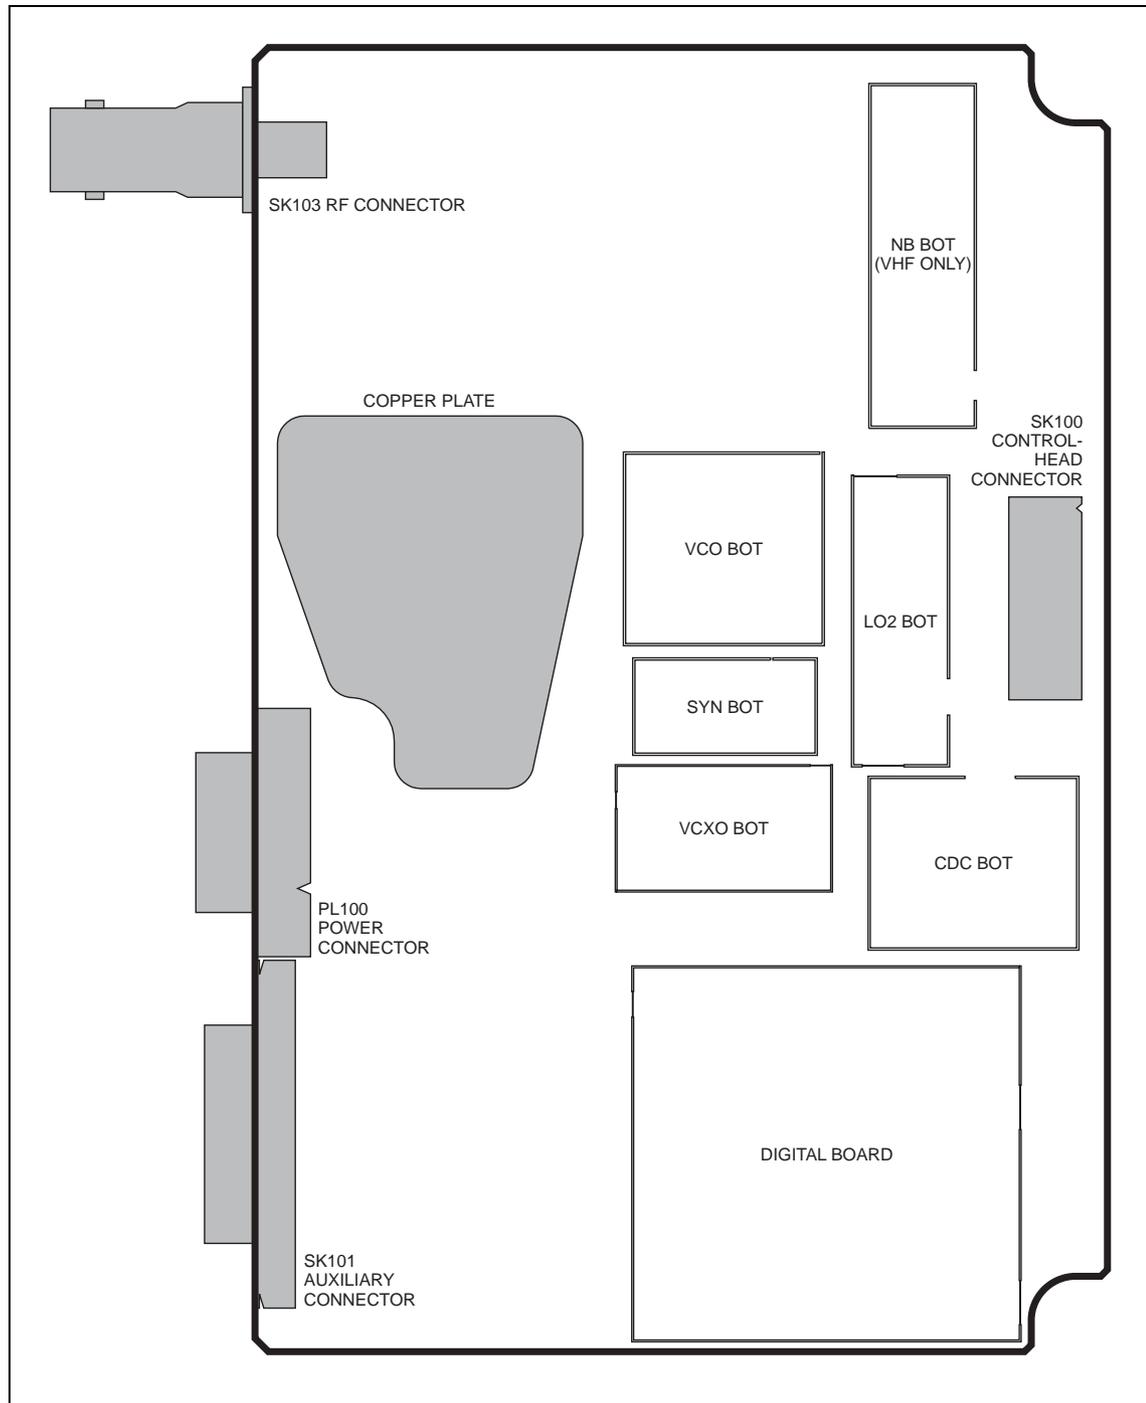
Shielding cans and connectors (bottom side of main-board assembly)
